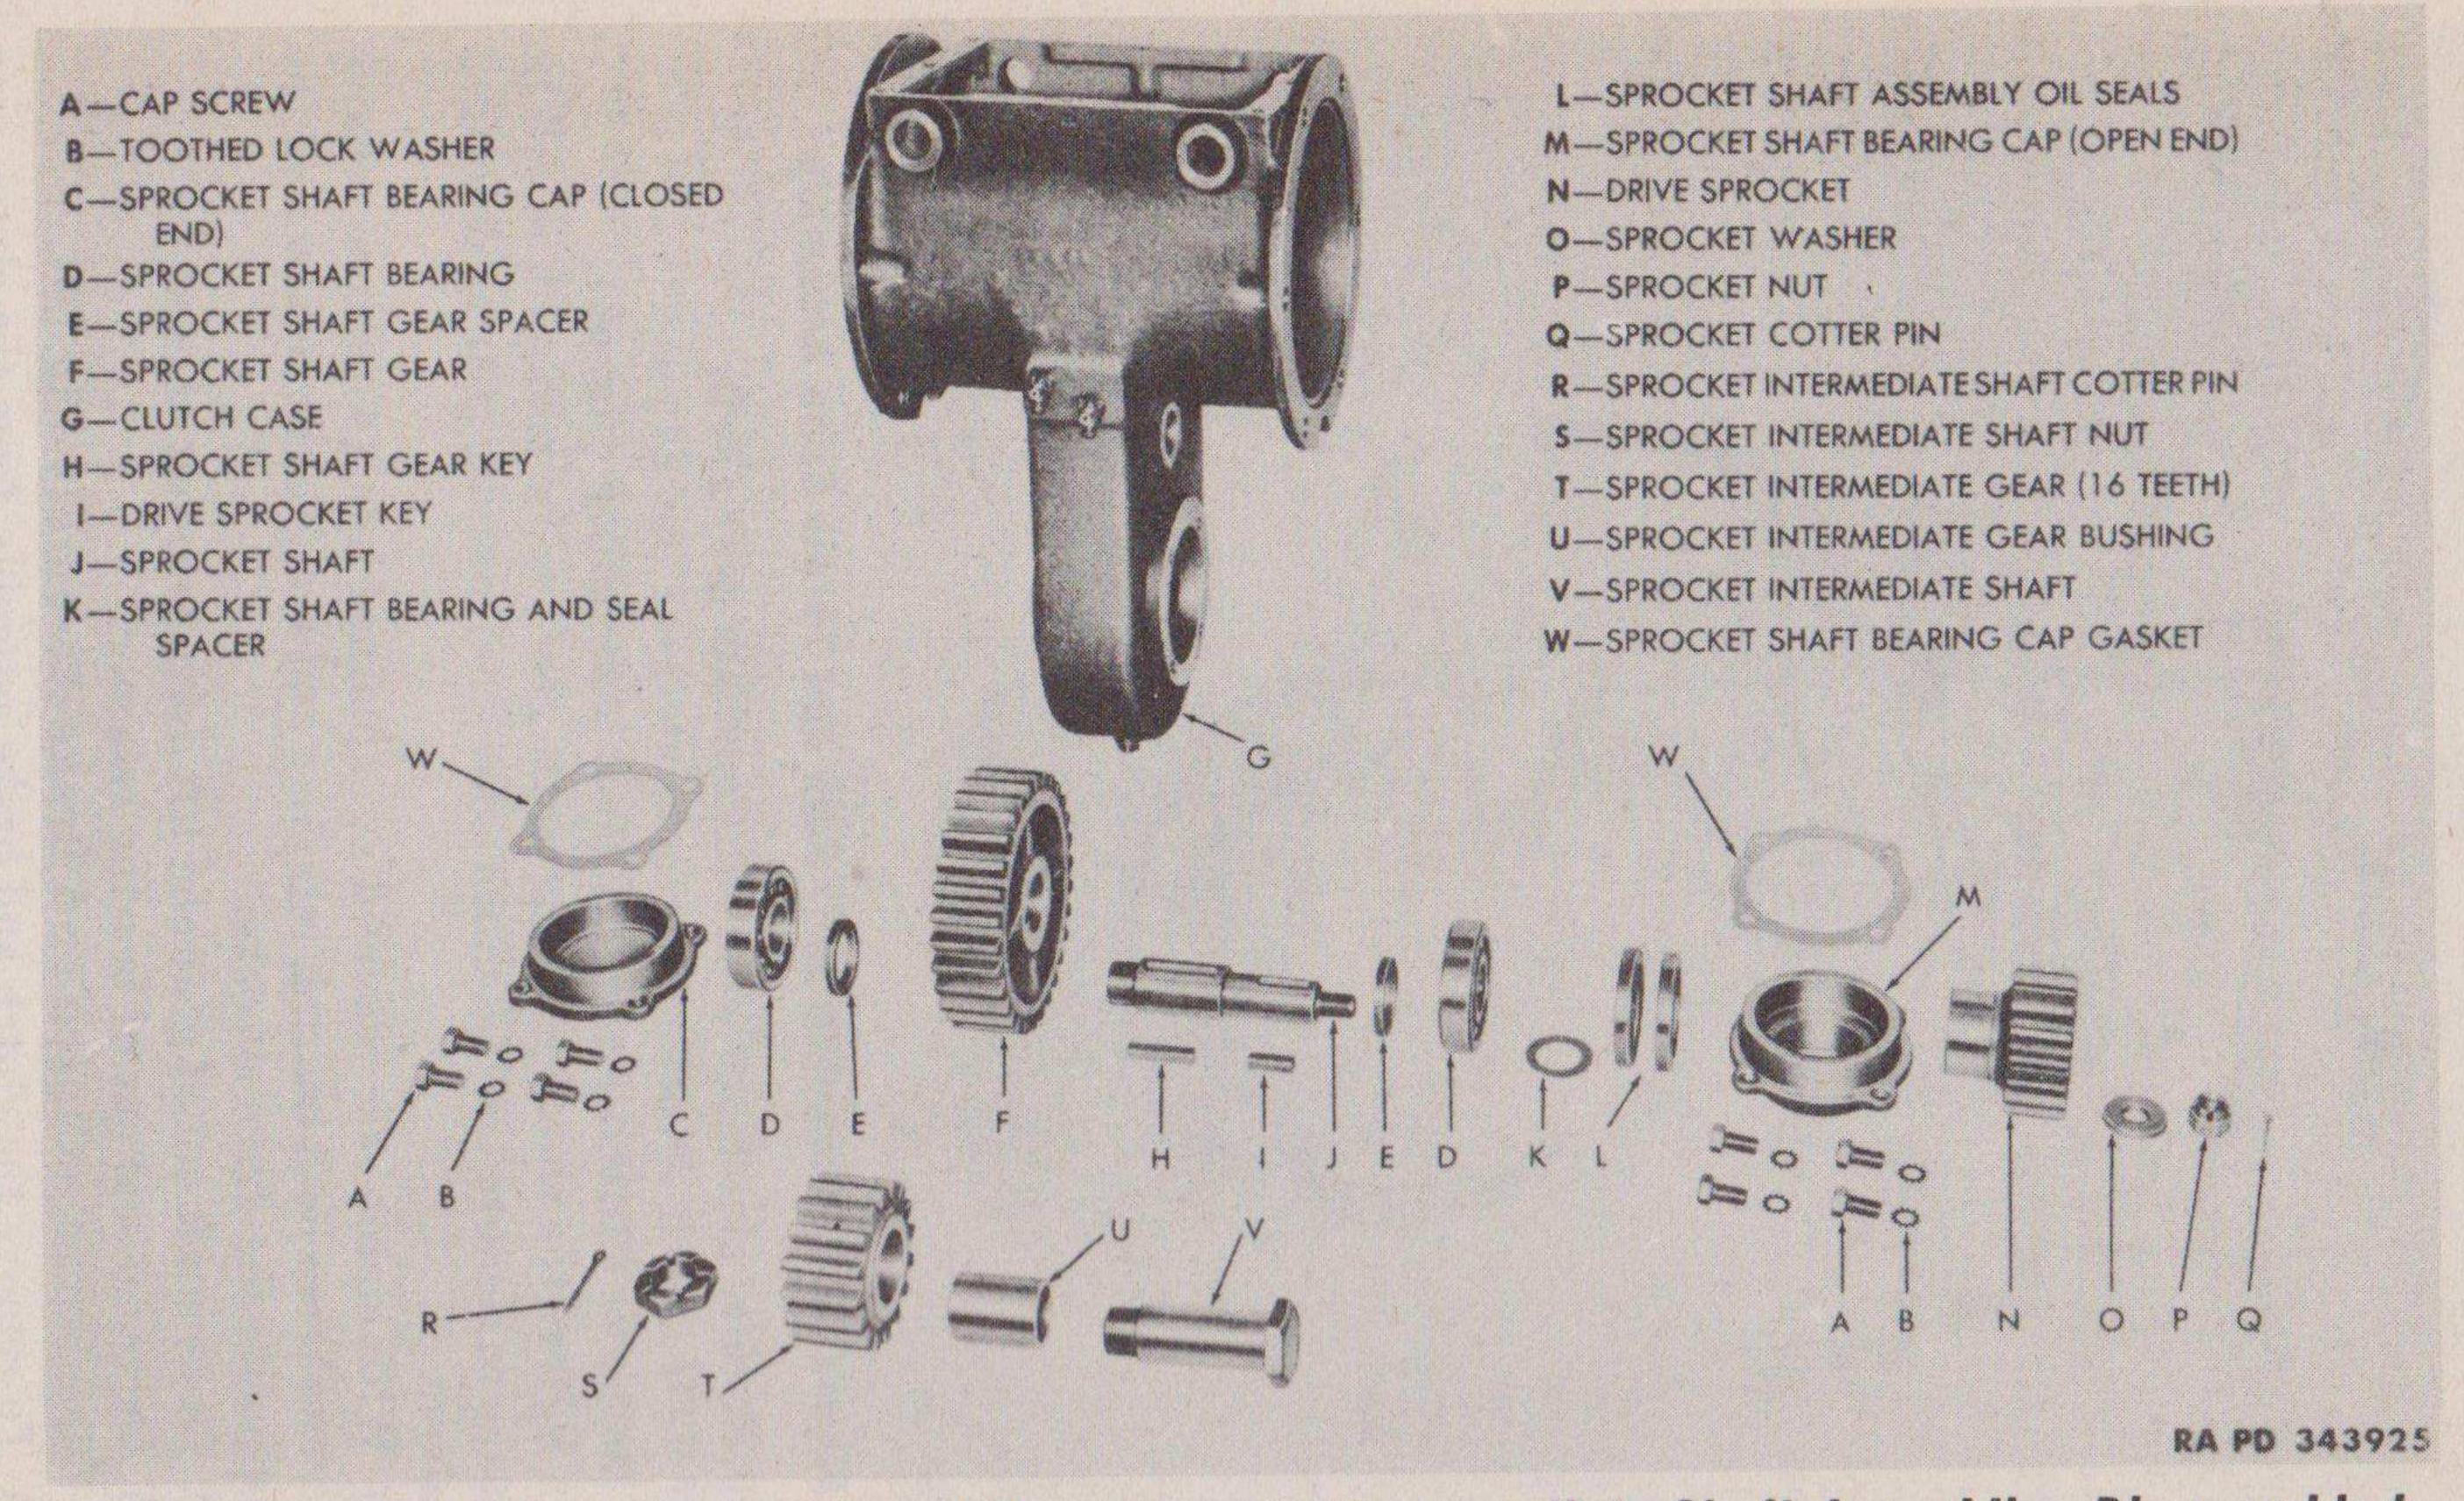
Clutch Sprocket Shaft and Clutch Sprocket Intermediate Shaft Assemblies, Disassembled
